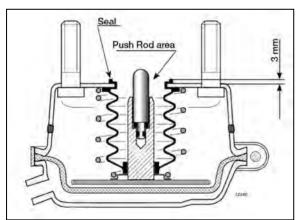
FRONT AND TAG AXLE BRAKE CHAMBER
